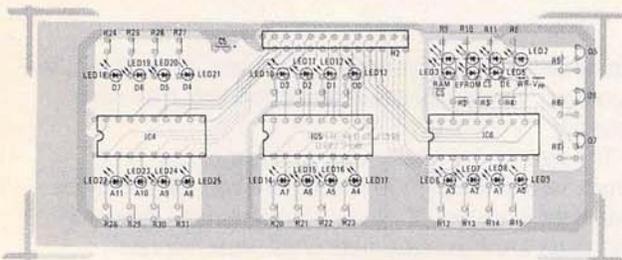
PARTS POSITIONING ON THE SMALL BOARD is shown here. Placement of the LED's is fairly critical as they must show through front panel holes.
